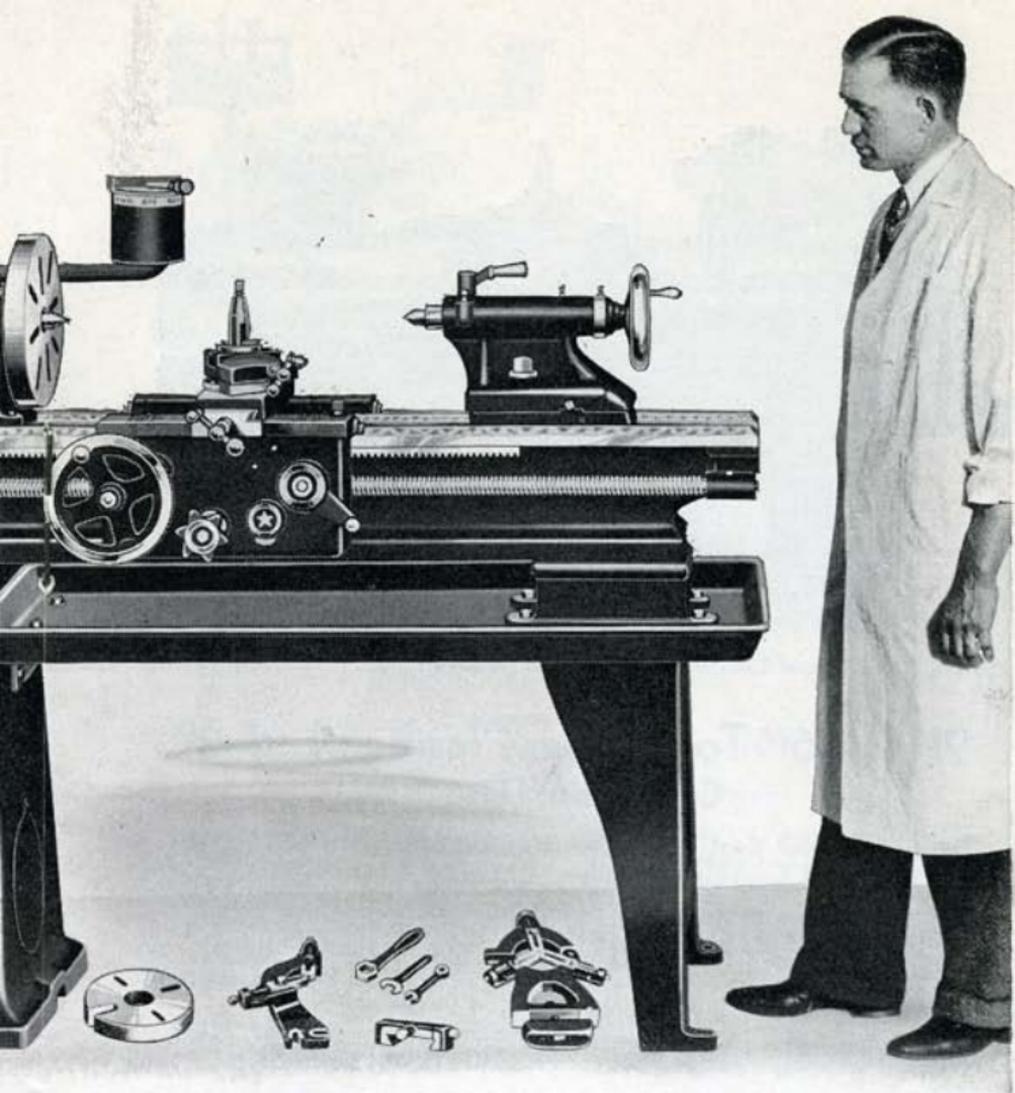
End view of Underneath Belt Motor Driven Lathe.
